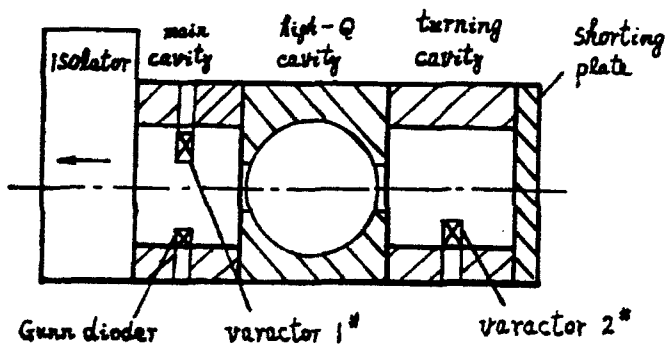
A crnss - section view of bi-turning VCO and its photo.
